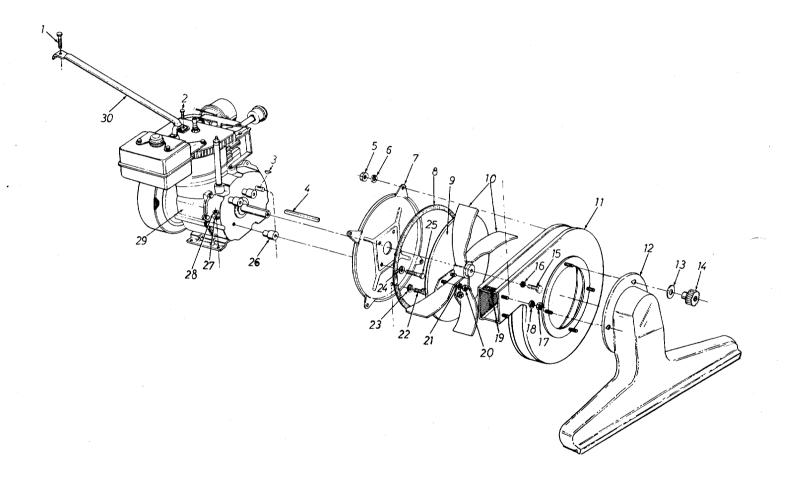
EXPLODED VIEW OF DRIVE ASSEMBLY
